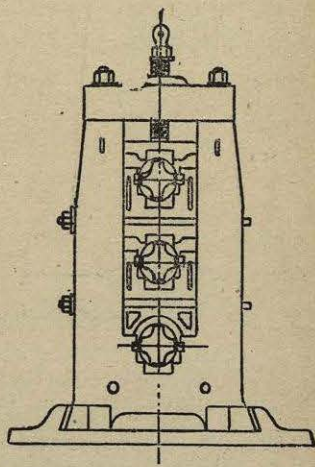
Small Open-topped Housing for Three-high Mill, provided with adjustments between the chocks.
